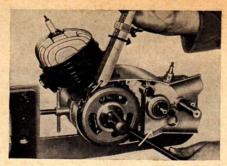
Complete engine fitted on the Universal-assembly-jig supporting arm.
